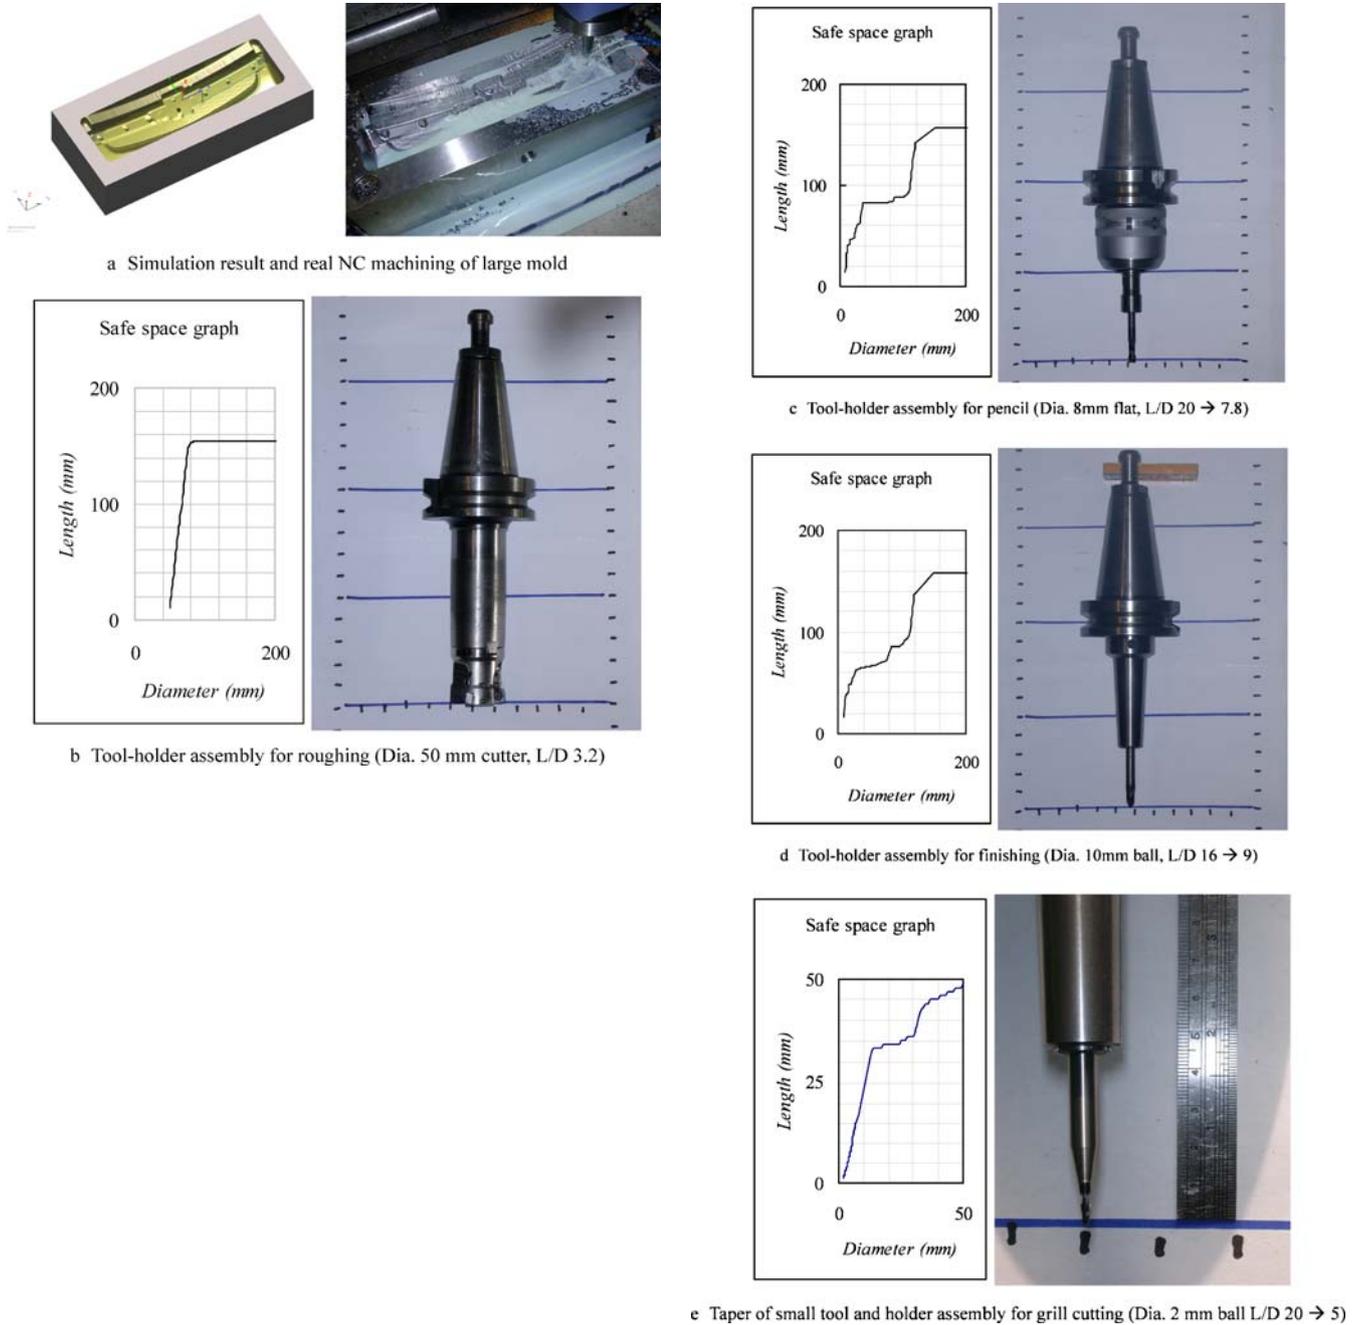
Experiment of tool-holder setting method using safe space; on the *left* is the safe space graph and on the *right* is the tool holder and arbor assembly used in NC machining
